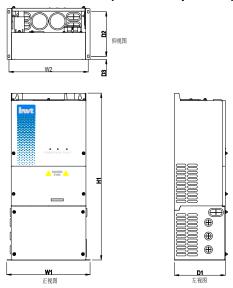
Floor installation (w/o top cover) for 220V 7.5-45kW/380V 15-90kW
